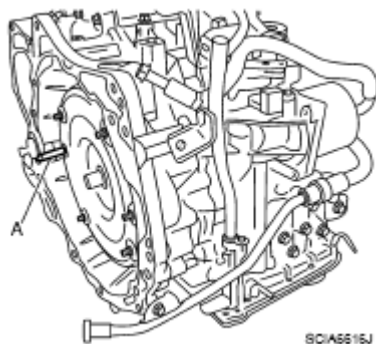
Identifying Transaxle Assembly Bolts
